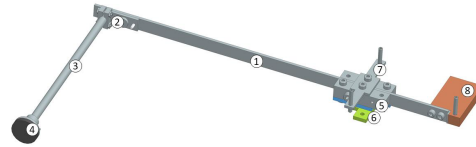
MFP pendulum design: main beam (1), clamp (2), shaft (3), target holder & target (4), mounting (5), sockets (blue - moving, green - fixed) (6), balancing mount (7), counterweight (8) [78].
